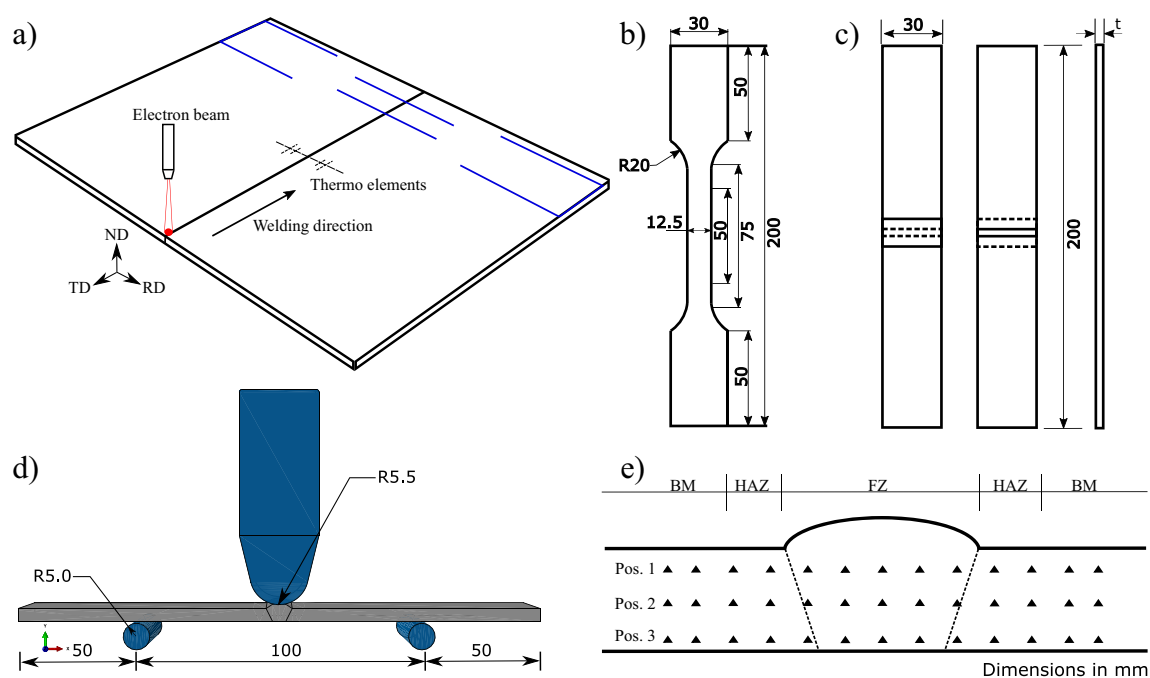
a Weld setup depicting the beam source and welding along the transverse direction (TD). b Tensile test sample geometry cut along the rolling direction (RD). c and d Face (left) and root (right) bending test
